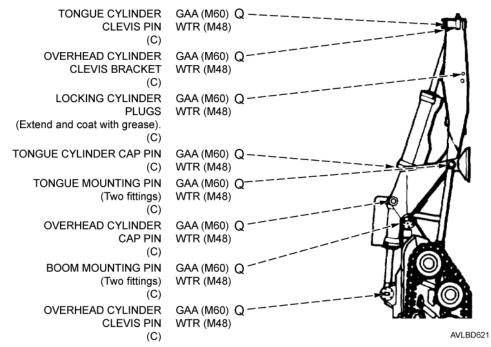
Launcher Tongue and Overhead Cylinder Clevis Location.
